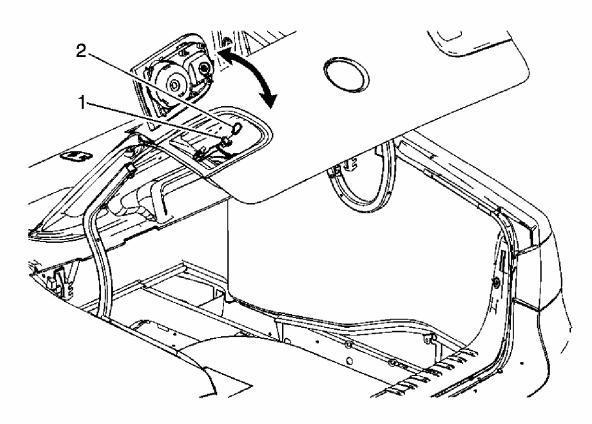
Locating Backup Lamp Bulb Courtesy of GENERAL MOTORS CORP.
